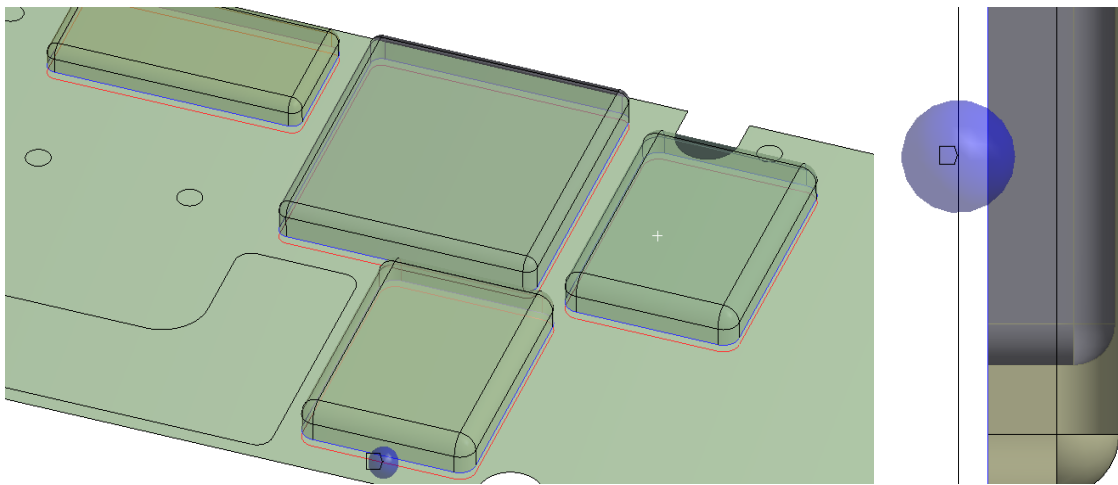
Mesh to mesh contact condition between RF board (red) and EMI shields (red), blue sphere indicating contact tolerance (necessary for surface to surface body contacts)
